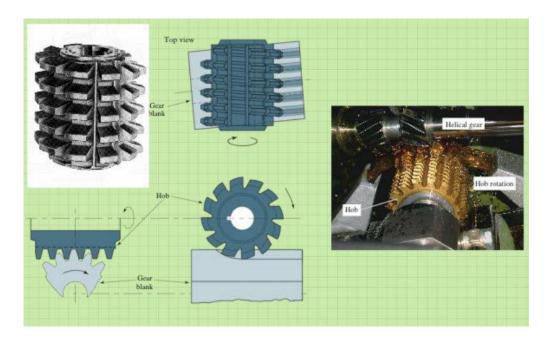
Hobbed and Milled Teeth Manufacturing
